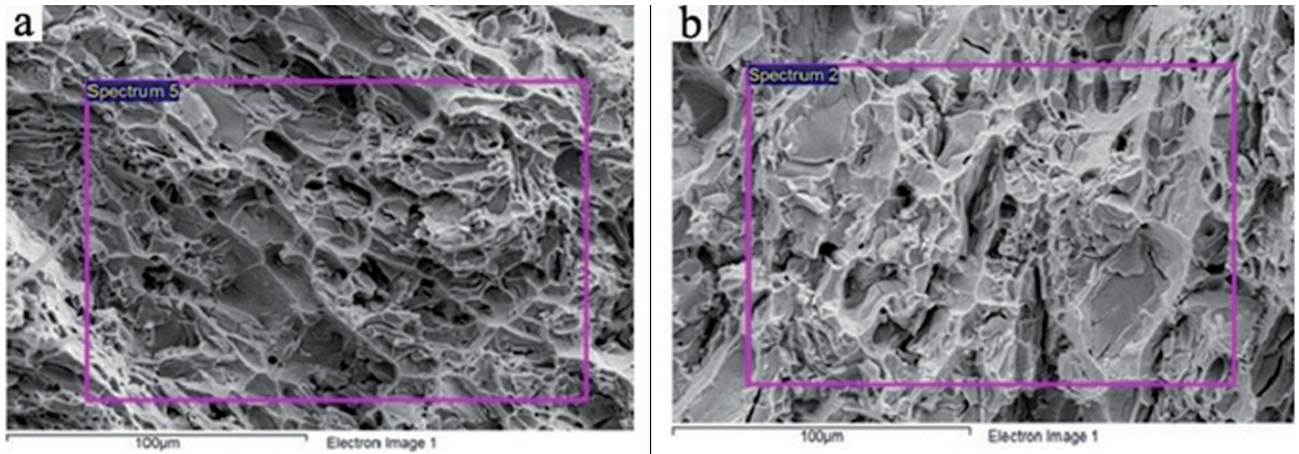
SEM fractograph of the tensile specimen of (a) GTA weld showing dimple ruptured surface with occasional boride cracking (b) SMA weld showing brittle fracture mode
